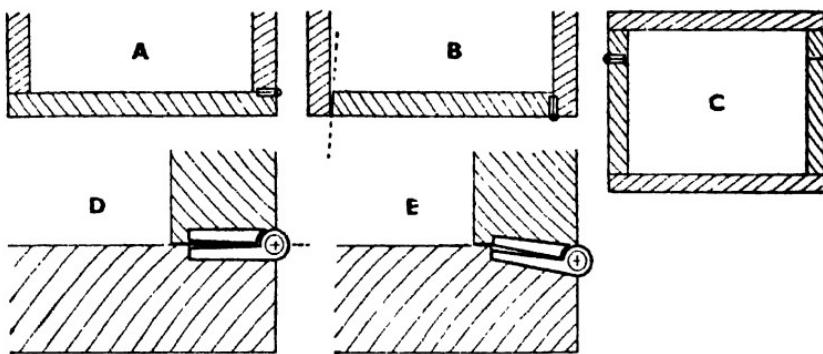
SECTIONS THROUGH HINGED JOINTS.
